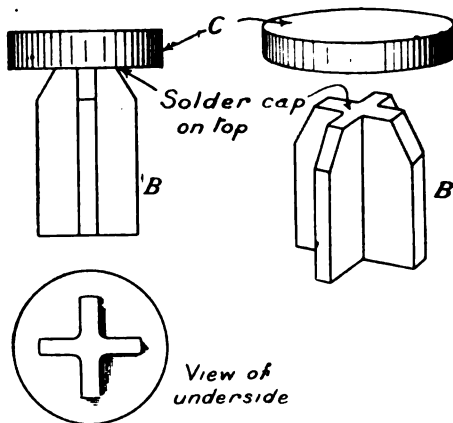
VALVES FOR PUMPS AND CHECK VALVES.
